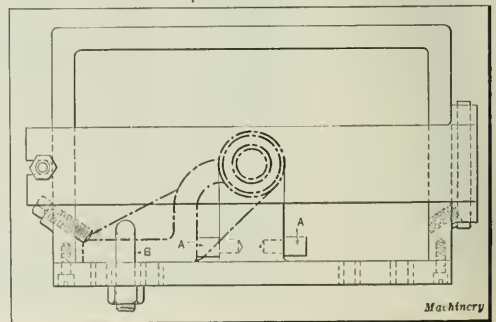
Box Jig used in Operation illustrated in Fig. 7
